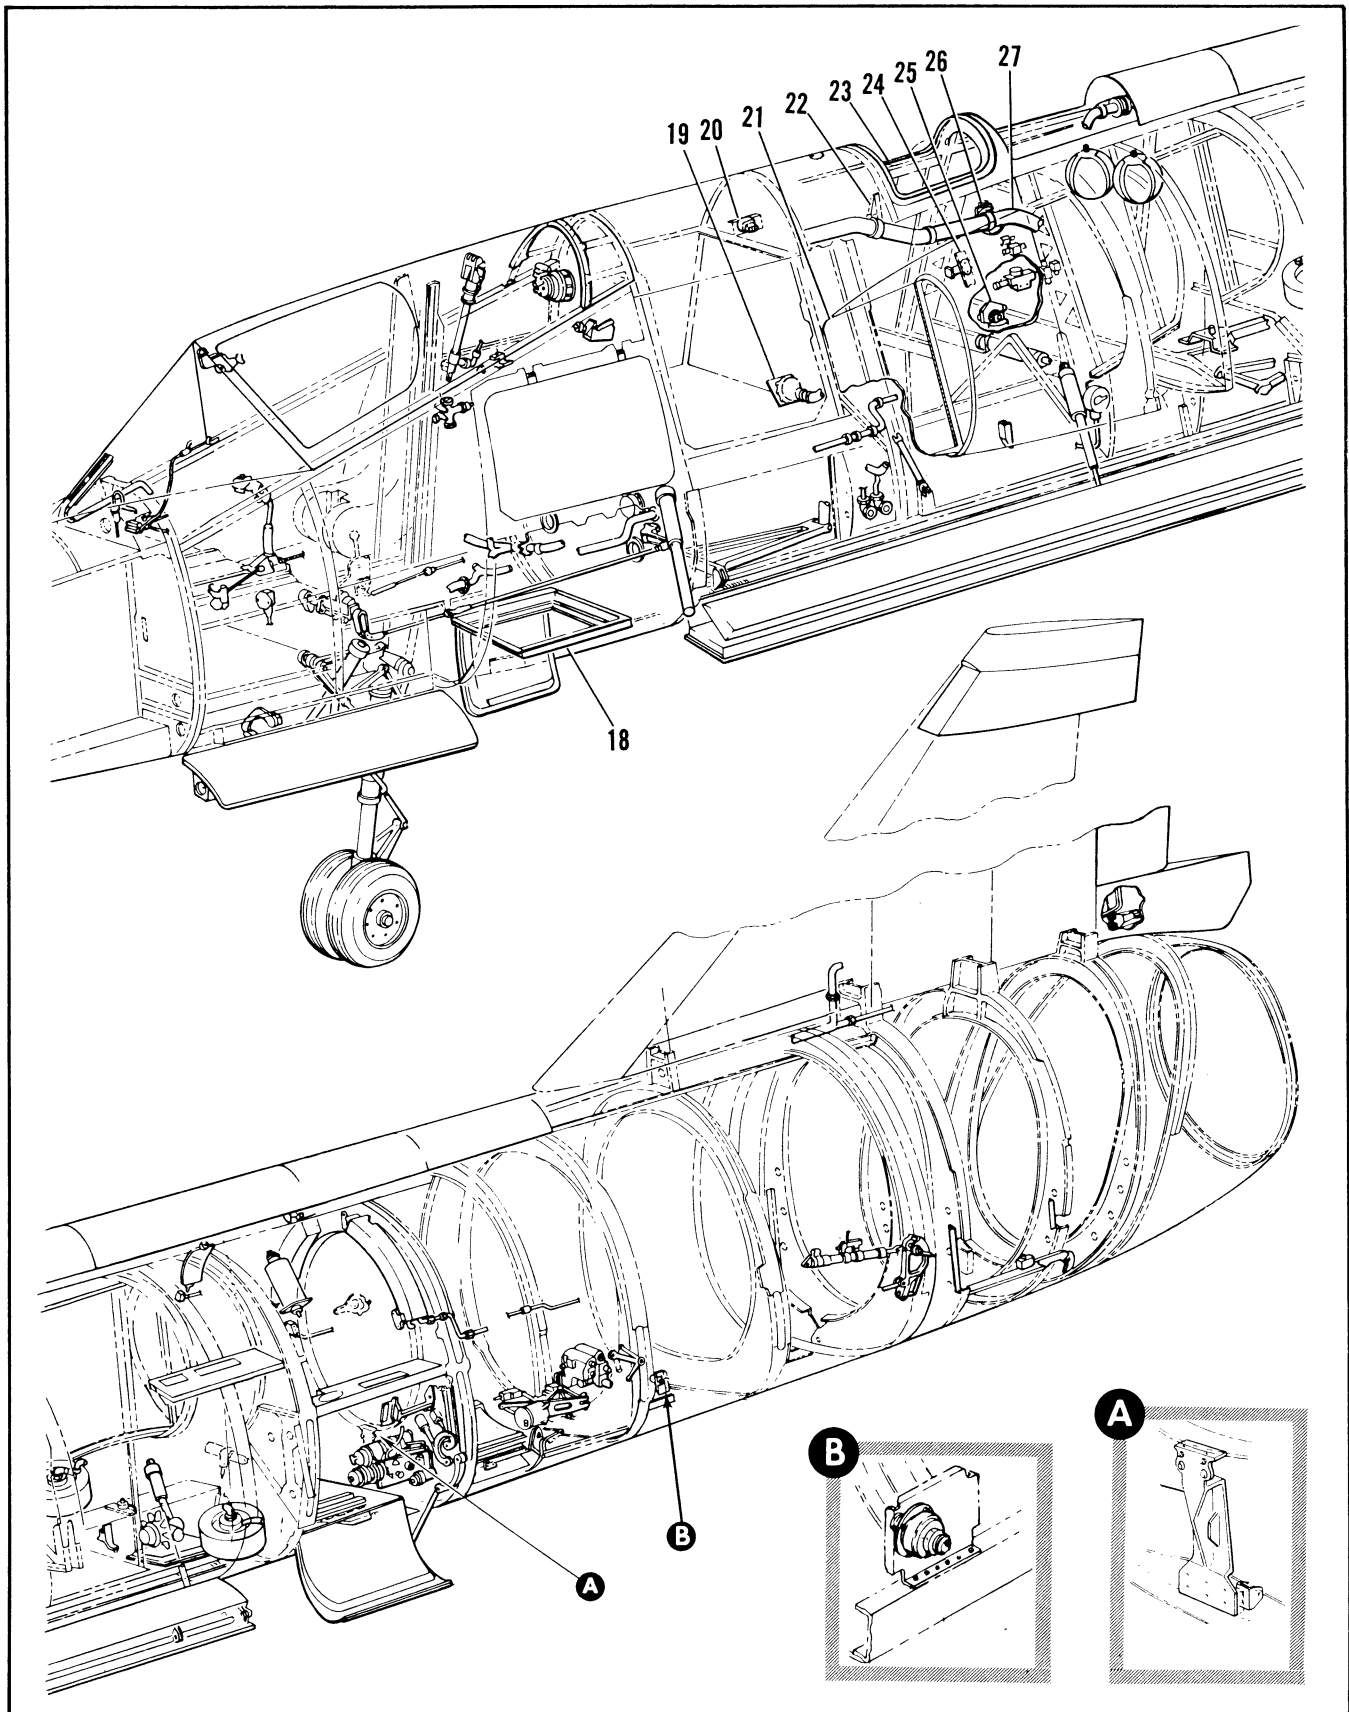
General Fuselage Assembly (Sheet 3 of 8)
